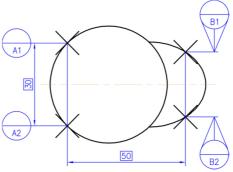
Example of use of moveable datum target frame (the motion of moveable datum target which is given by the direction of the modifier ,,moveable" is parallel to a line going through the datum targets A1 and A2)
